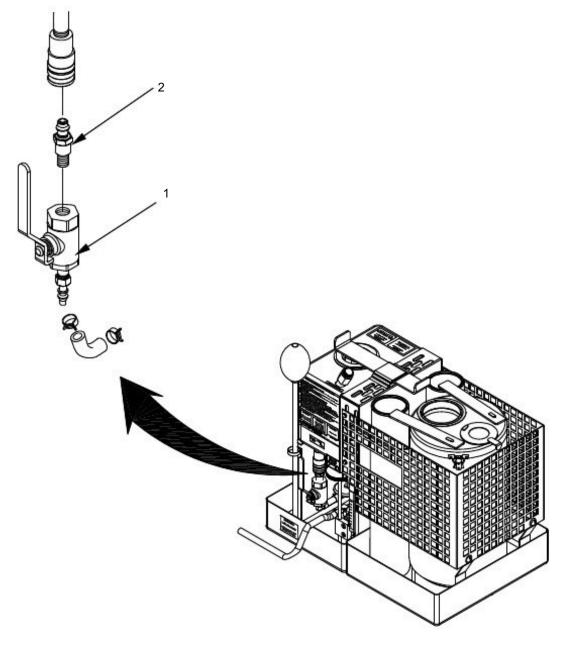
Group 05 Fuel Shut-off Valve Assembly
